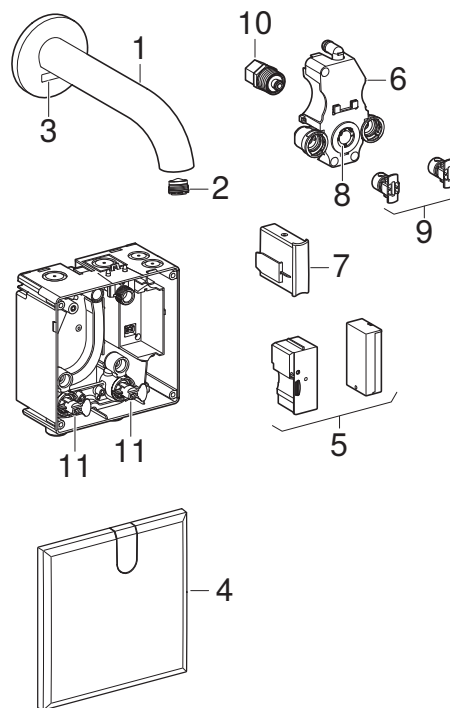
Chicago Faucets lavatory faucets, wall-mounted
